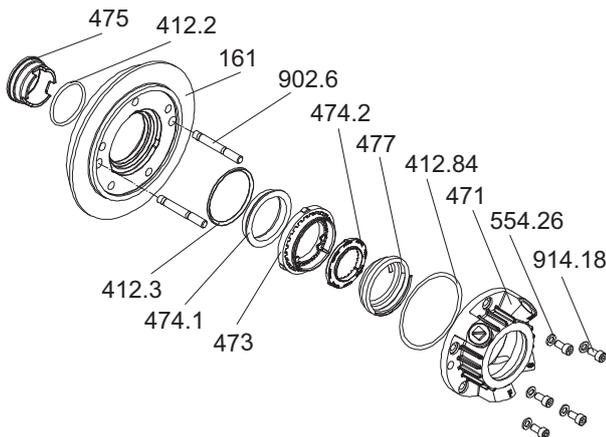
Dismounting the ALFA KSS RS cover casing sub-assembly
